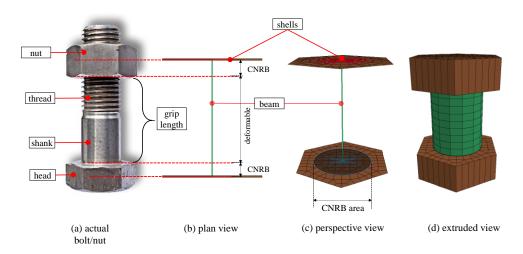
Finite element model of bolt/nut, (a) actual bolt/nut, (b) plan view, (c) perspective view, (d) extruded view
